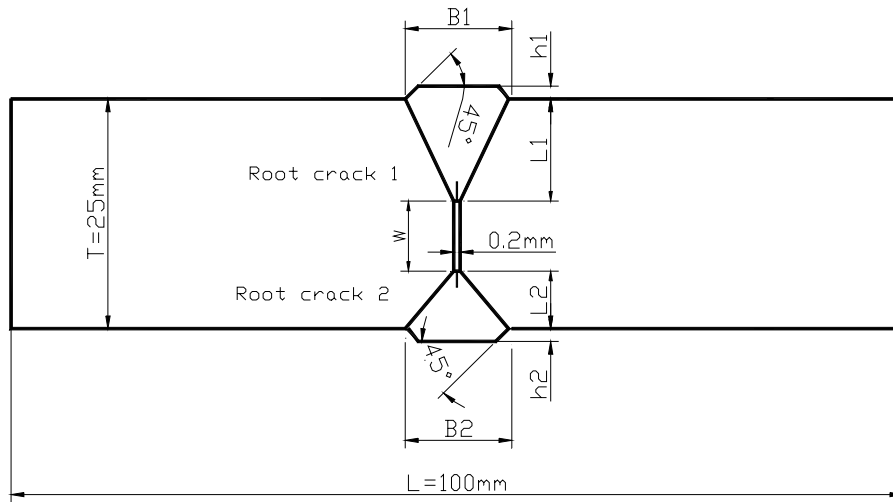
Dimensions of the butt joint welded from both sides
